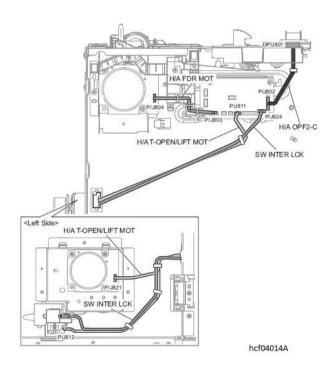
T-open, lift motor, rear interlock switch, FDR motor, OPF2-C
